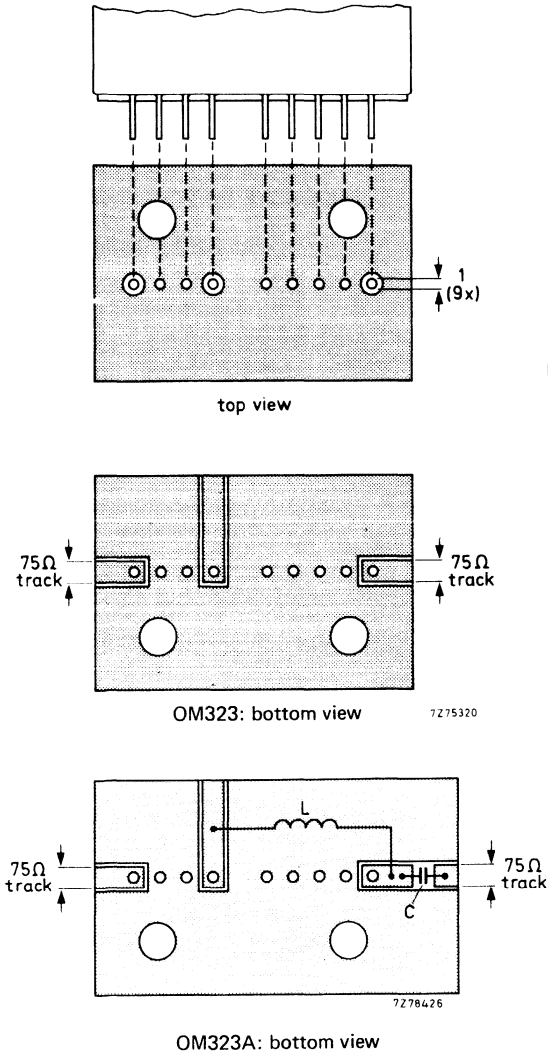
Printed-circuit board holes and tracks for the OM323 and OM323A.
